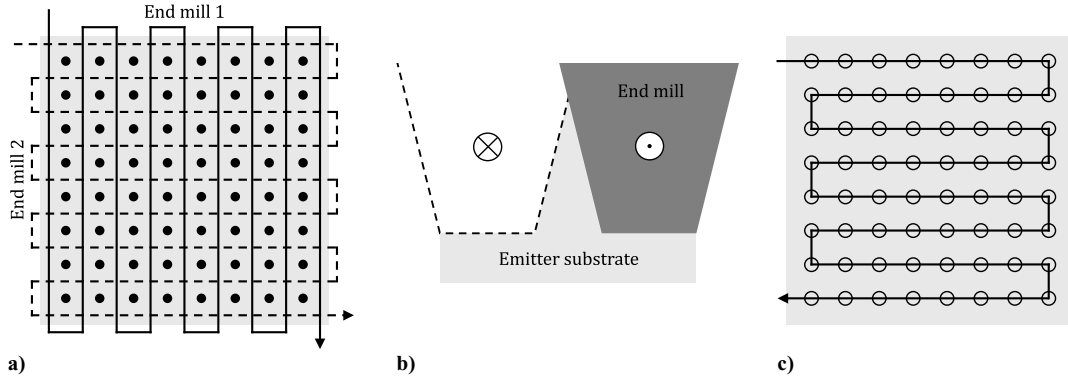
Schematic of machining: a) emitter tool path, b) emitter side view, and c) extractor tool path.
